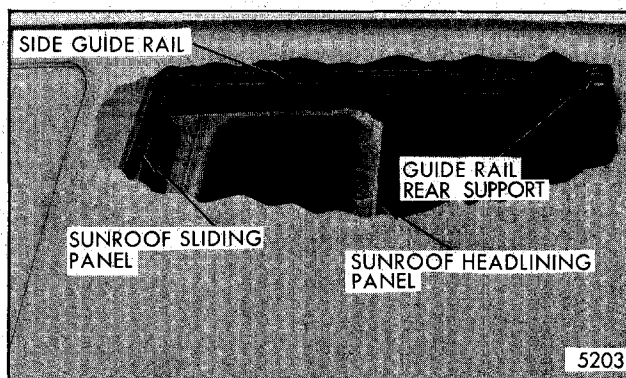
Sun Roof Panel Headlining Engagement in Side Guide Rail
